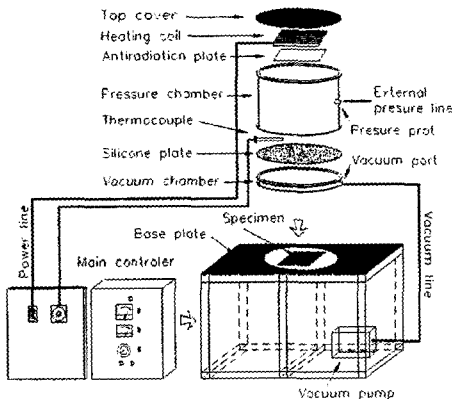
Sketch of Vacuum-Press Curing Equipment(VP Curing Equipment)
